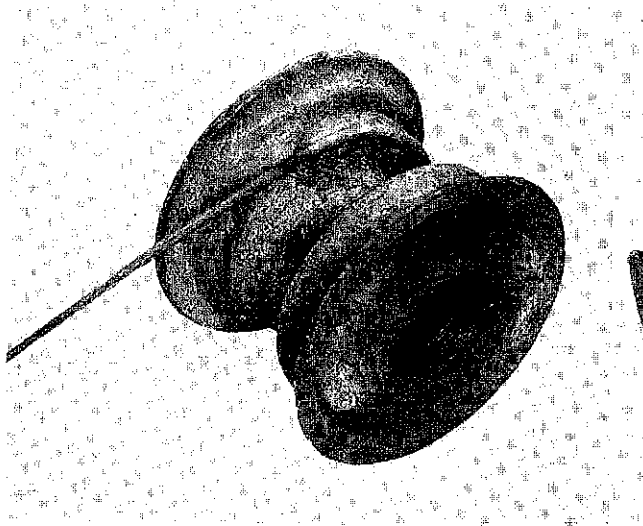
WORN TRACK ROLLER SHOWING $\frac{1}{4}$ " MILD STEEL ROD PARTIALLY WELDED IN POSITION.
